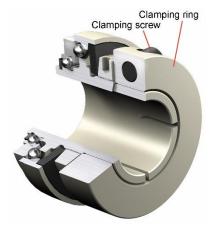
Assembly of SYNTEX®-NC (hub design 6.1)
